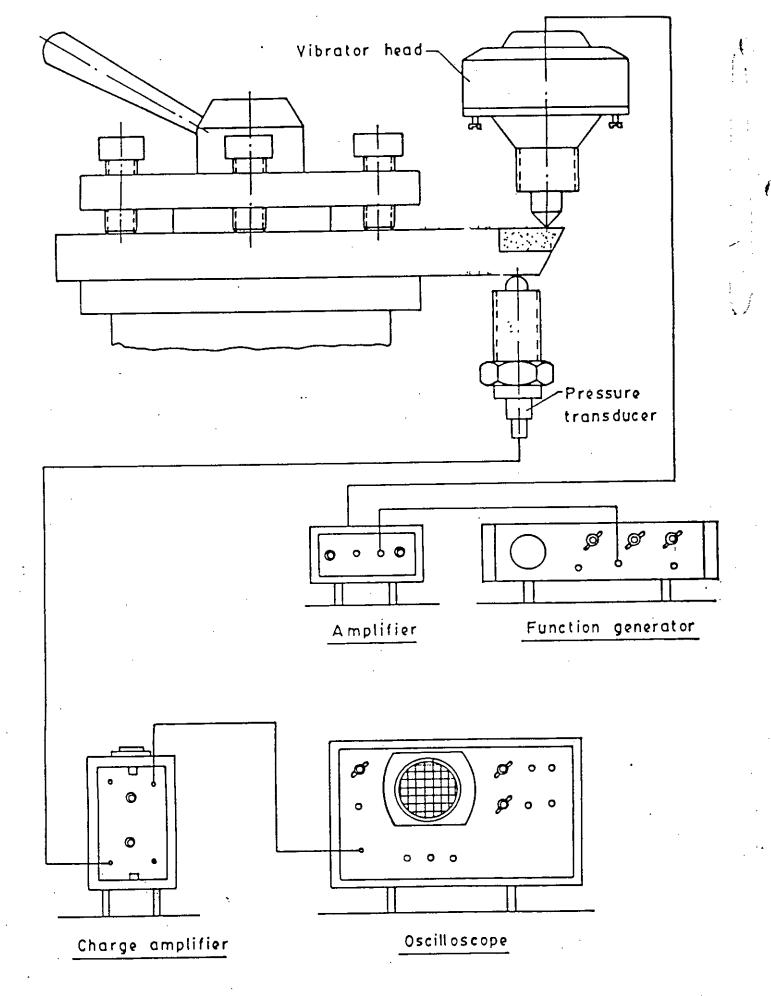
Experimental setup for natural frequency determination of tool bit holder using vibrator head
